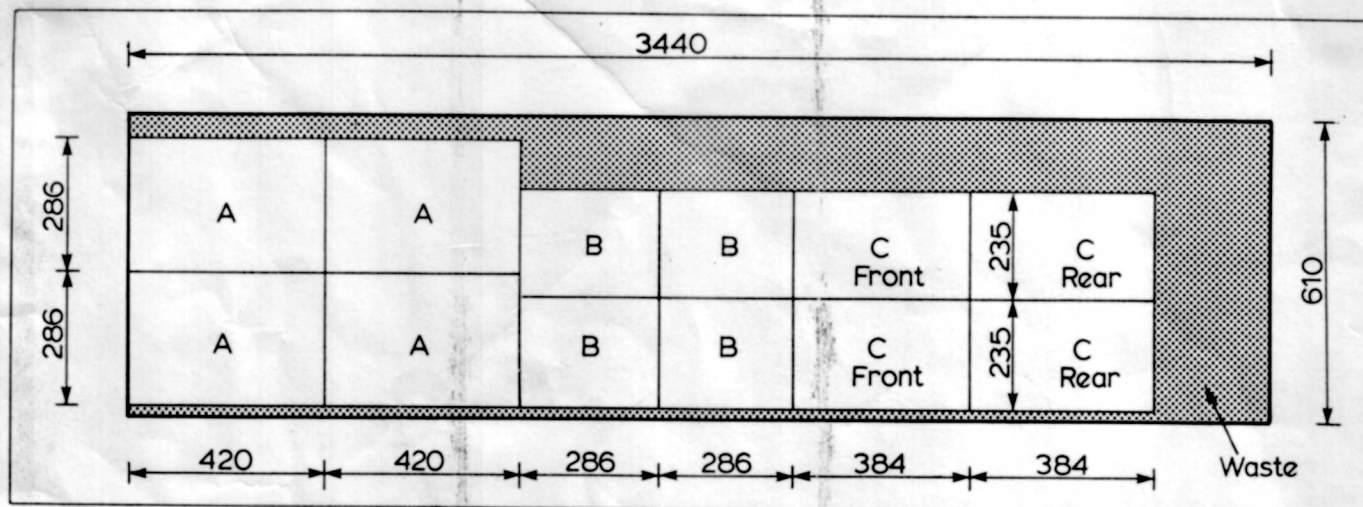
Cutting plan. Material is one 8 ft x 2 ft sheet of 18mm flooring-grade chipboard.
